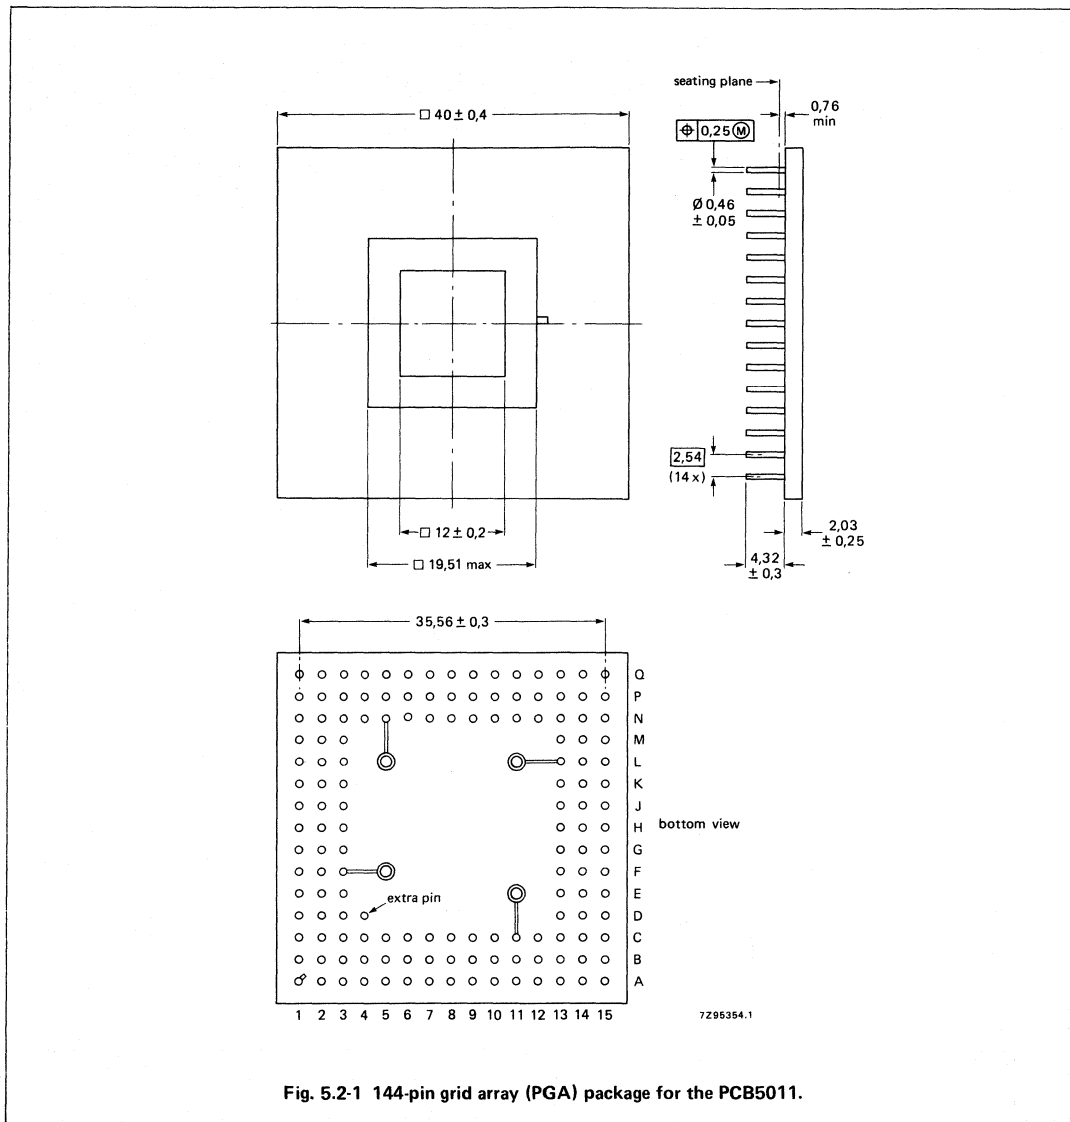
144-pin grid array (PGA) package for the PCB5011.
